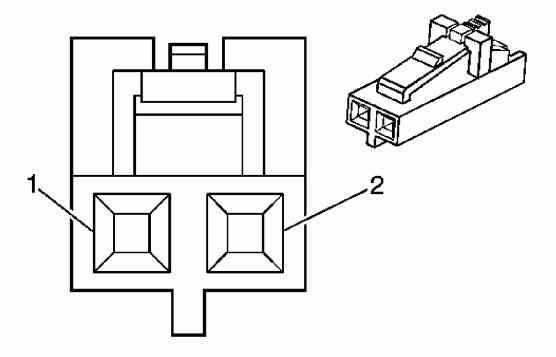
Horn Switch Connector End View Courtesy of GENERAL MOTORS CORP.
